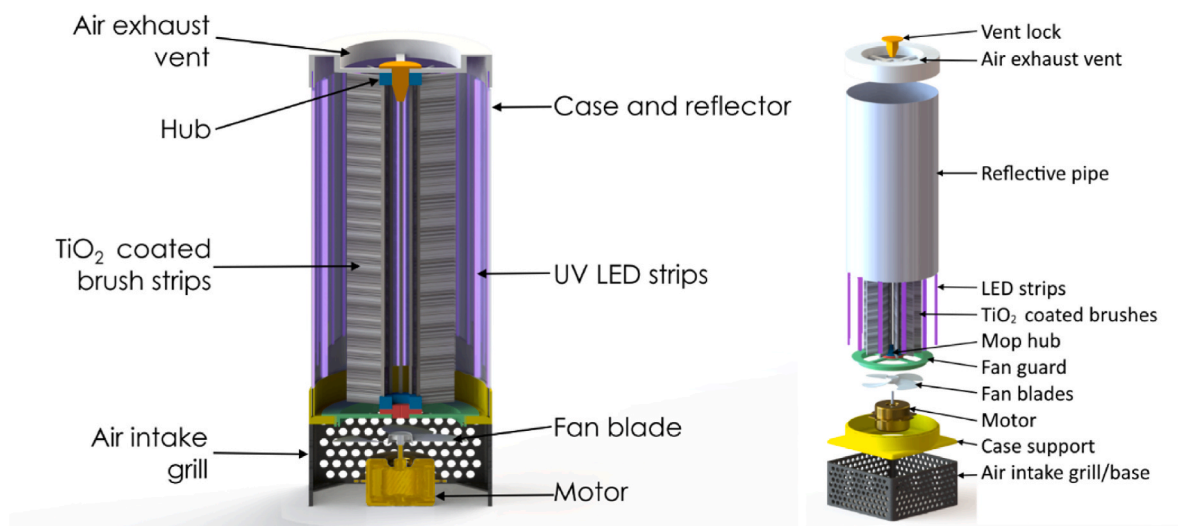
Prototype CAD assembly: cross-section (left), exploded view (right).
